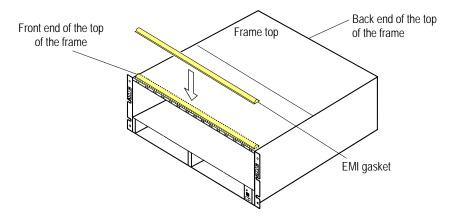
Position for Attaching EMI Gasket (Base Unit)
